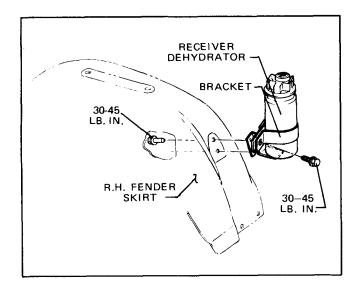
A-112 Receiver Dehydrator Mounting - B Series
